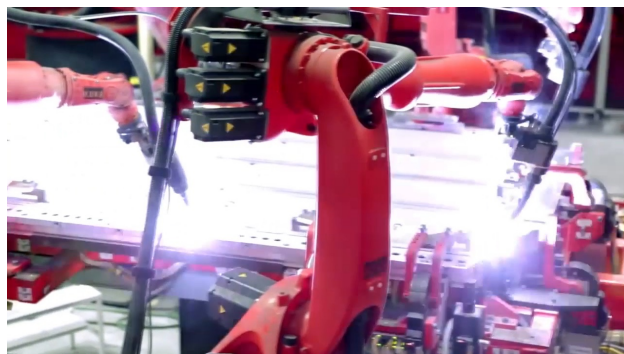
A Kuka Robot Arm Welding a Car Body
